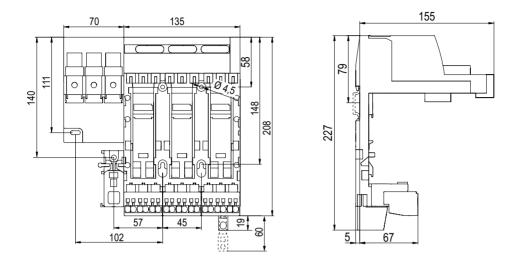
Dimension drawing of screw-type infeed (50/70 mm<sup>2</sup>) featuring outgoing terminals with spring-loaded connection technology
